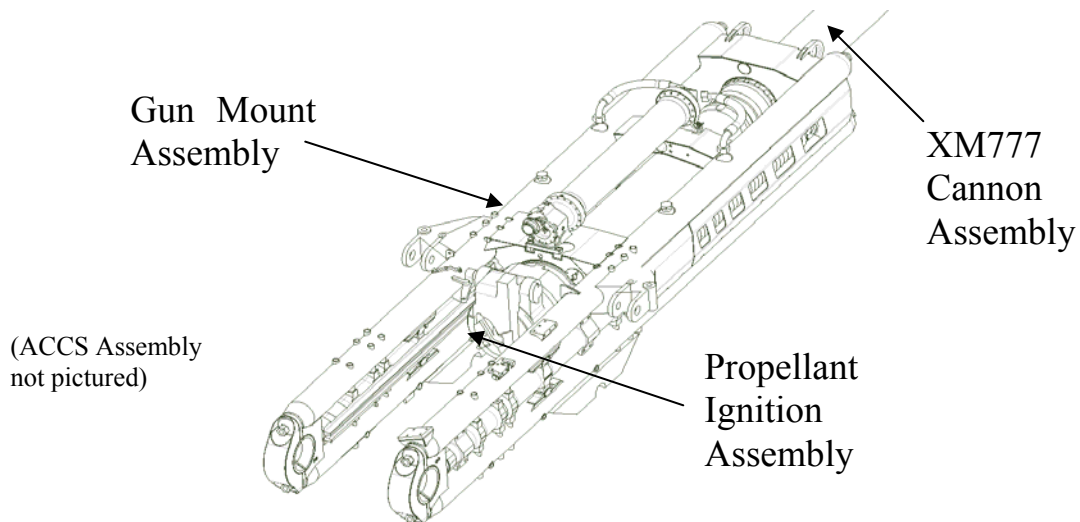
XM777 155mm Cannon and Gun Mount Breech Assembly
